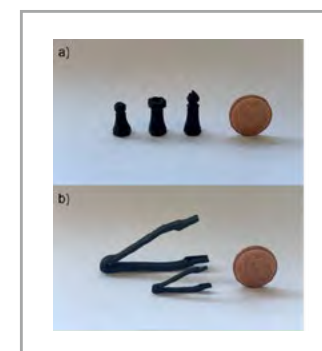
(a) Optical photograph of SL 3D printed chess pieces and (b) tweezers with different dimensions.
